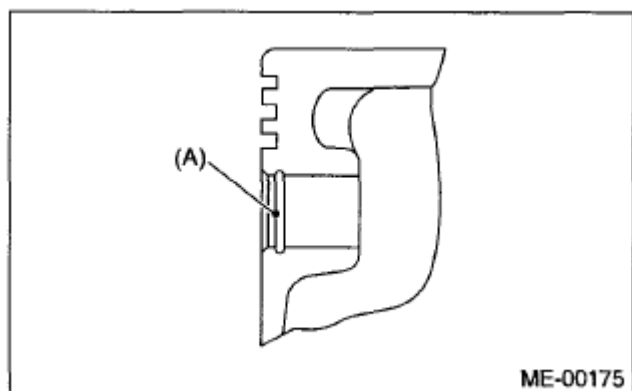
Checking Snap Ring Installation Groove On Piston For Burr
